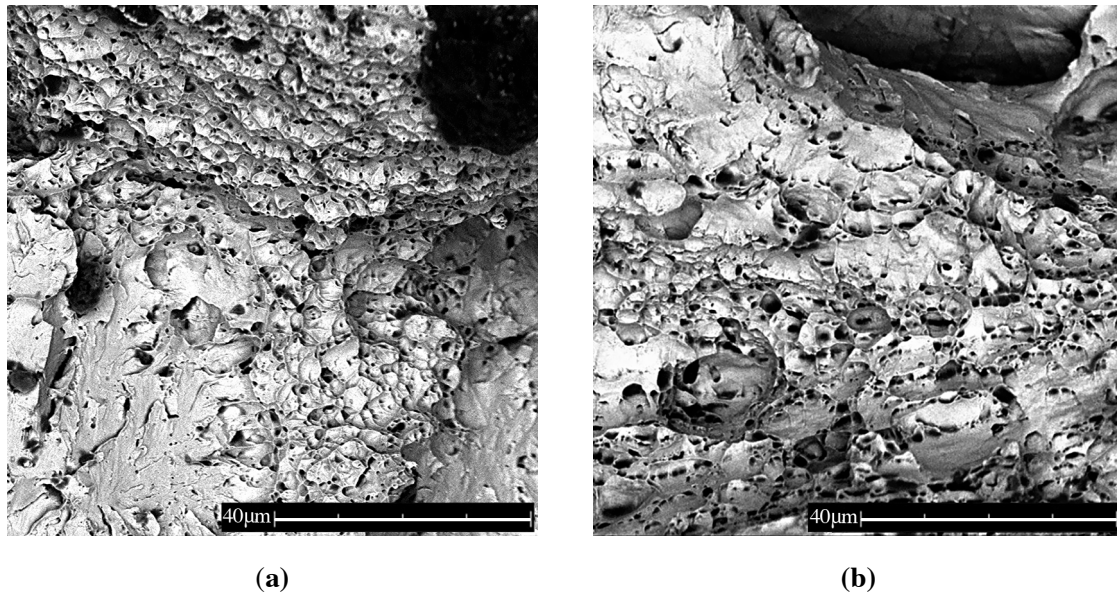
Fractographic image of the weld metal fractures (a) and near-weld area of the heat affected zone (b) of the welded joint obtained by LHW with subsequent cap weld application, $\times 3,000$.
